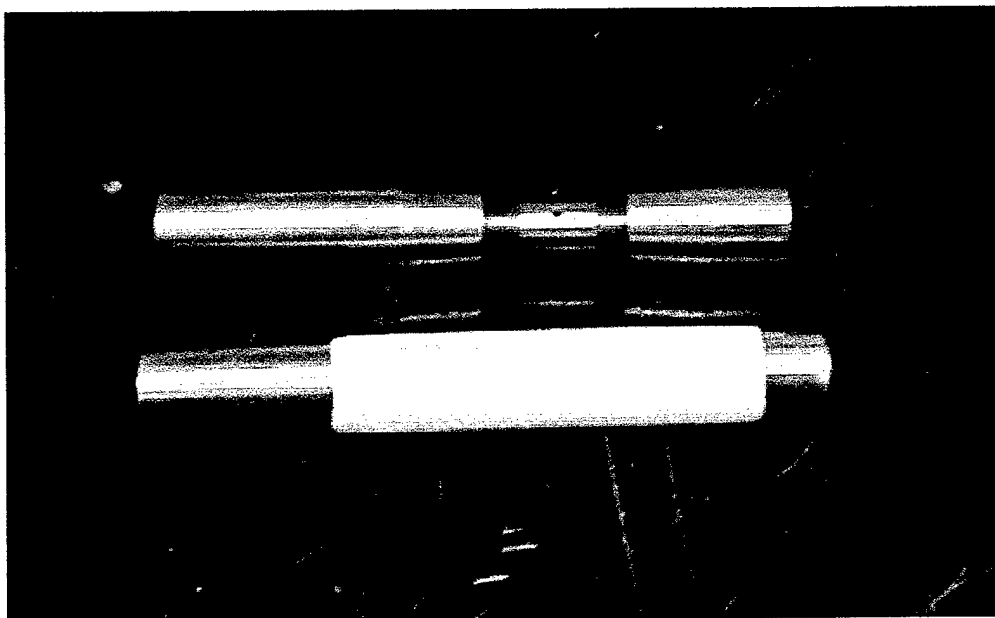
Photo of brass mandrel and mandrel with CMC tube attached.
